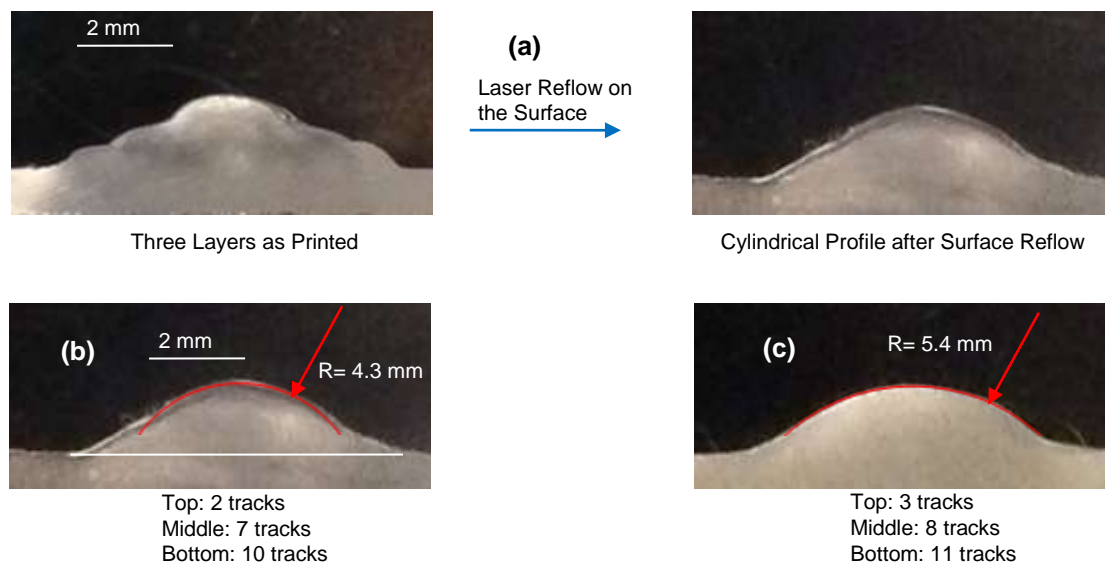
The printed cylindrical-convex geometries (a) a printed sample before and after laser reflowing; (b) and (c) the cross-section view of two printed cylindrical surfaces
